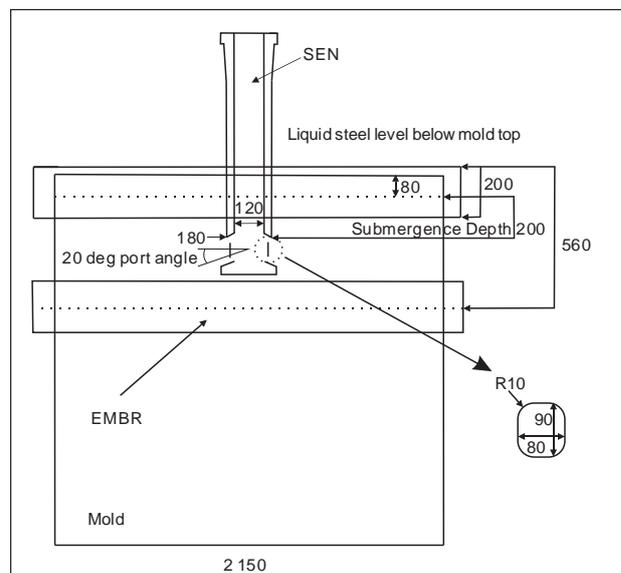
Schematic of the industrial slab caster with two rectangles showing the location of FC-mold electromagnetic brake (all dimensions in mm)
